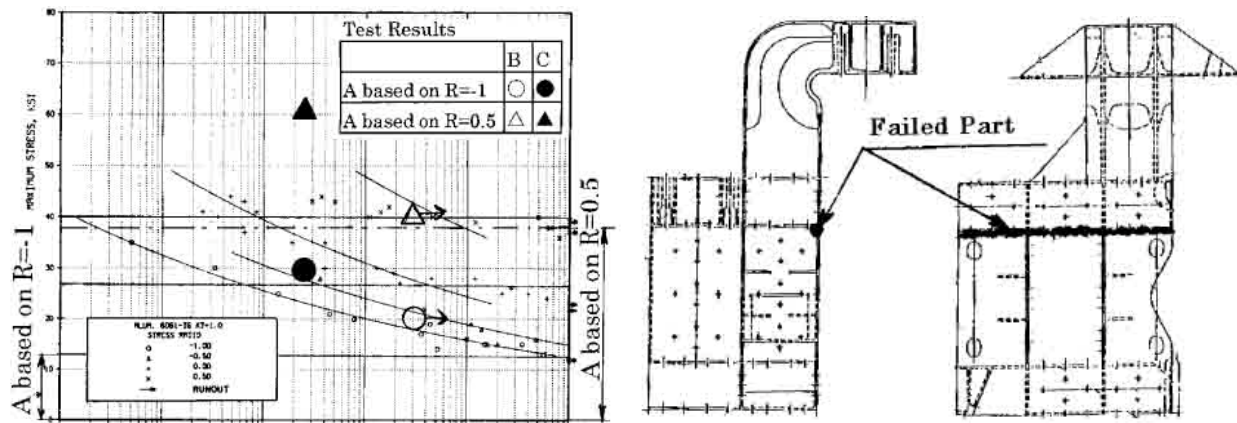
Results of fatigue testing for rectangular FRP tubes and aluminium joint parts
